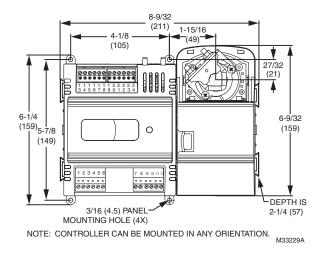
Panel mounting—controller and actuator dimensions in inches (mm) for CVB4022AS-VAV1 only.
